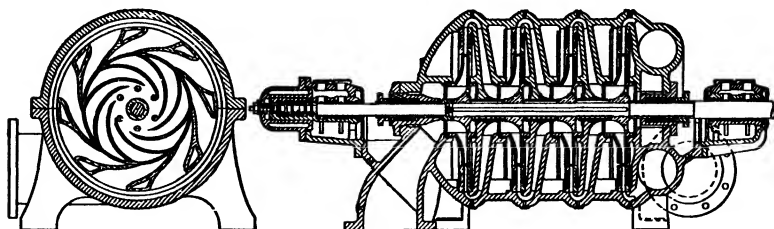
Sectional elevation of 4-stage, type "S" turbine pump.
